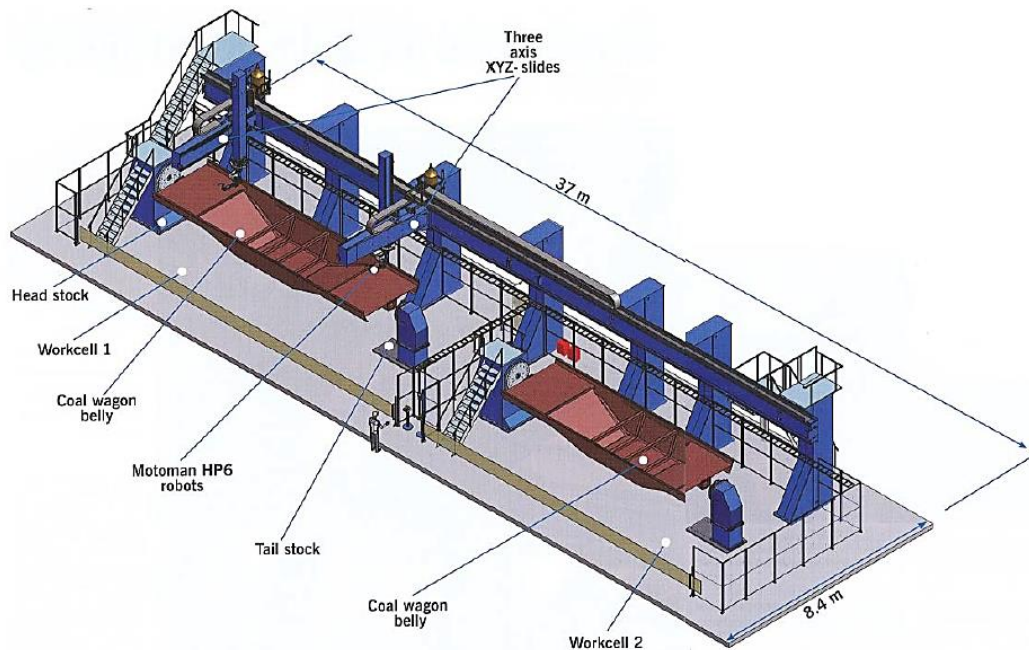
Motoman robotic gantry system for welding coal cars [Motoman, 2007]
